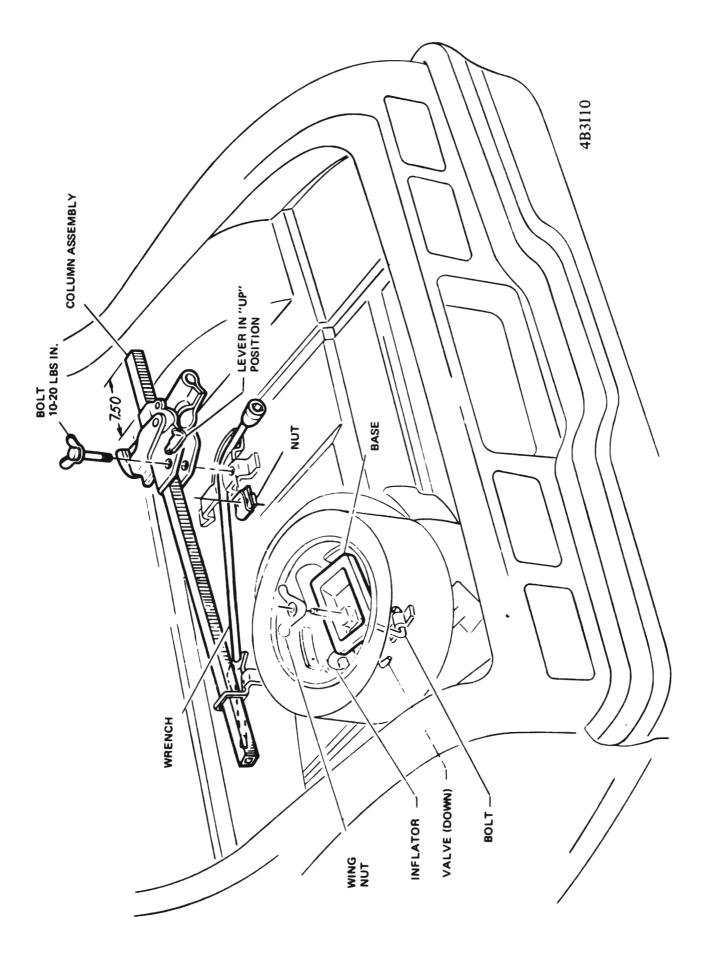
I-10 X Series Spare Tire and Jack Installation - Hatch Back Coupe
